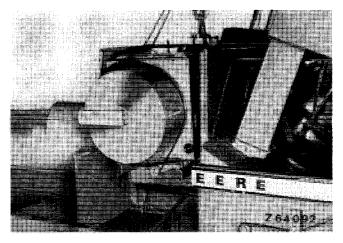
Engine Being Removed Sideways from Side of Combine
